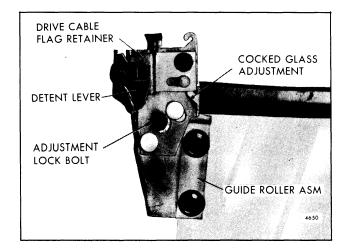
Window Guide Roller Assembly - Upper Right
